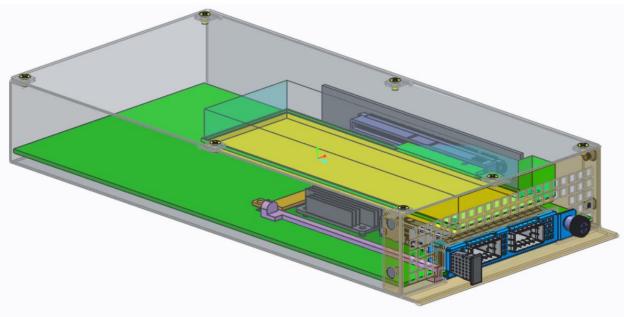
Small Card Thermal Test Fixture Preliminary Design
